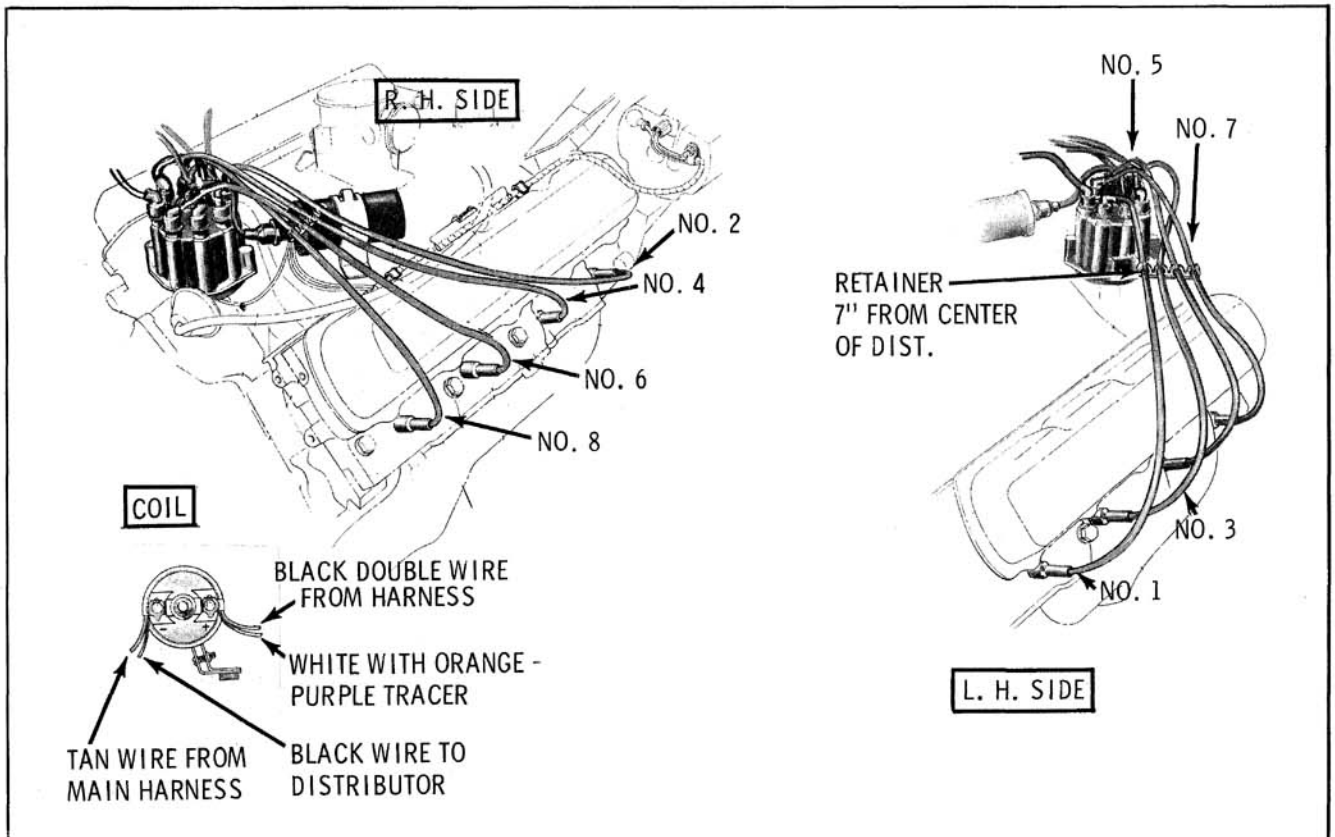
Spark Plug Wiring (33 through 52 Series)
